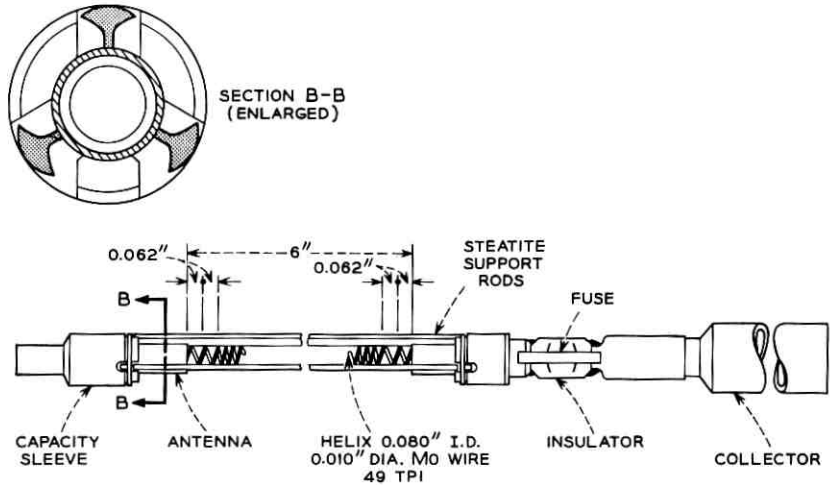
Helix assembly, showing cross section with special undercut F66 ceramic support rods.
